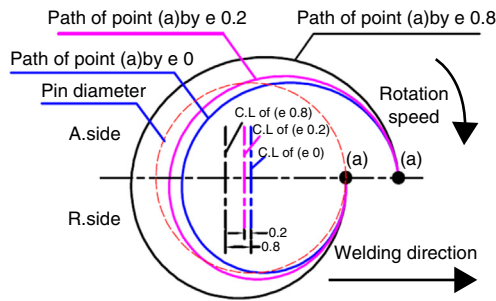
Paths of point “a” on pin surface, at 500 mm/min welding speed, produced by tools with pin eccentricity (e) of 0, 0.2, and 0.8 mm.
